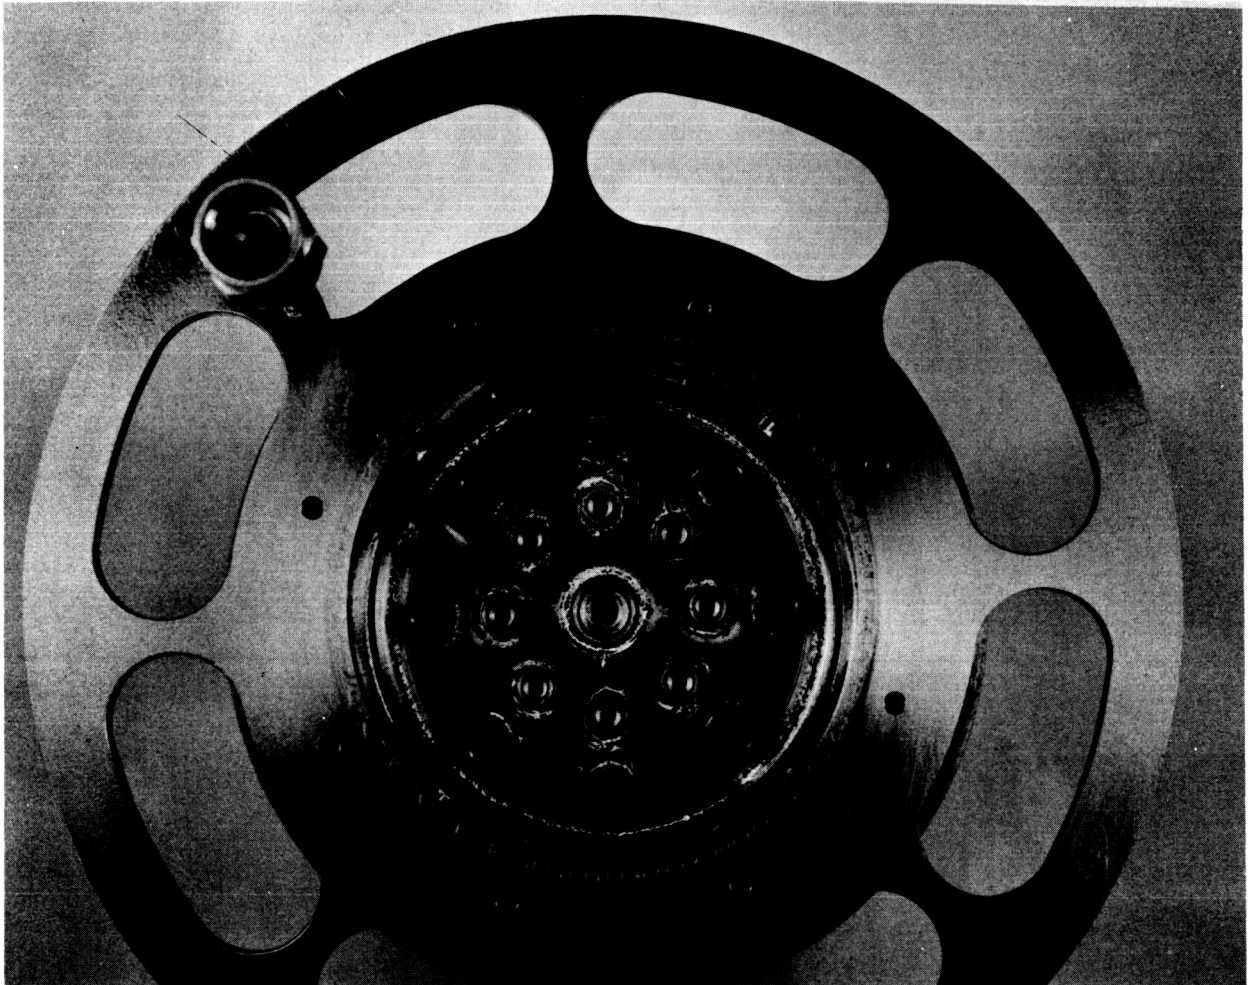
100-lb Injector After Electron Beam Welding
